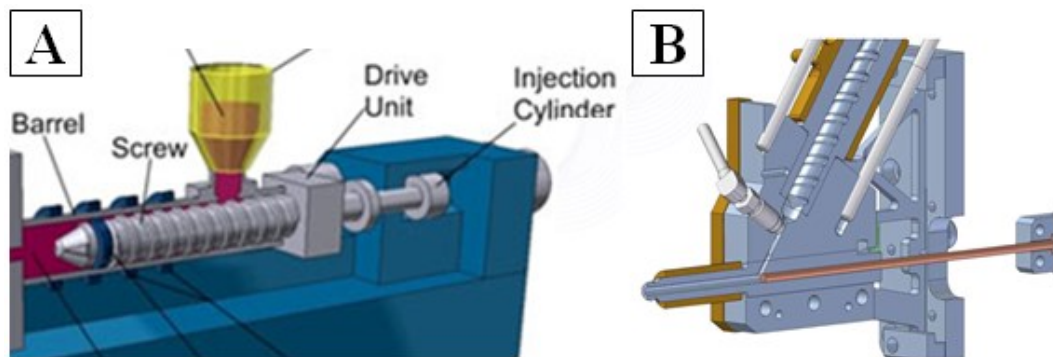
Traditional single-screw injection unit (A) and micro-injection molding plastication-injection separated melt delivery zones (B).
